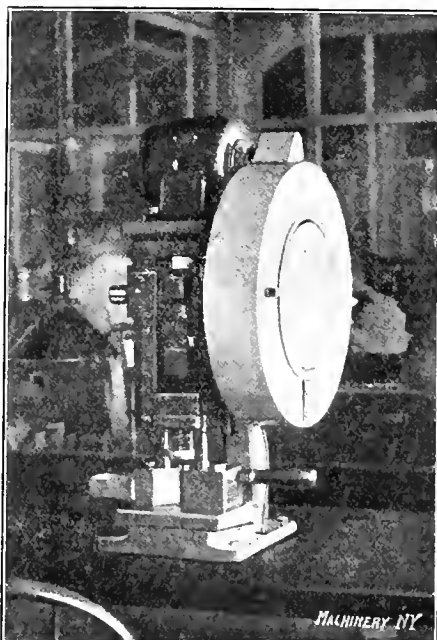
Guard over Pinion and Gear of Motor-driven Press
